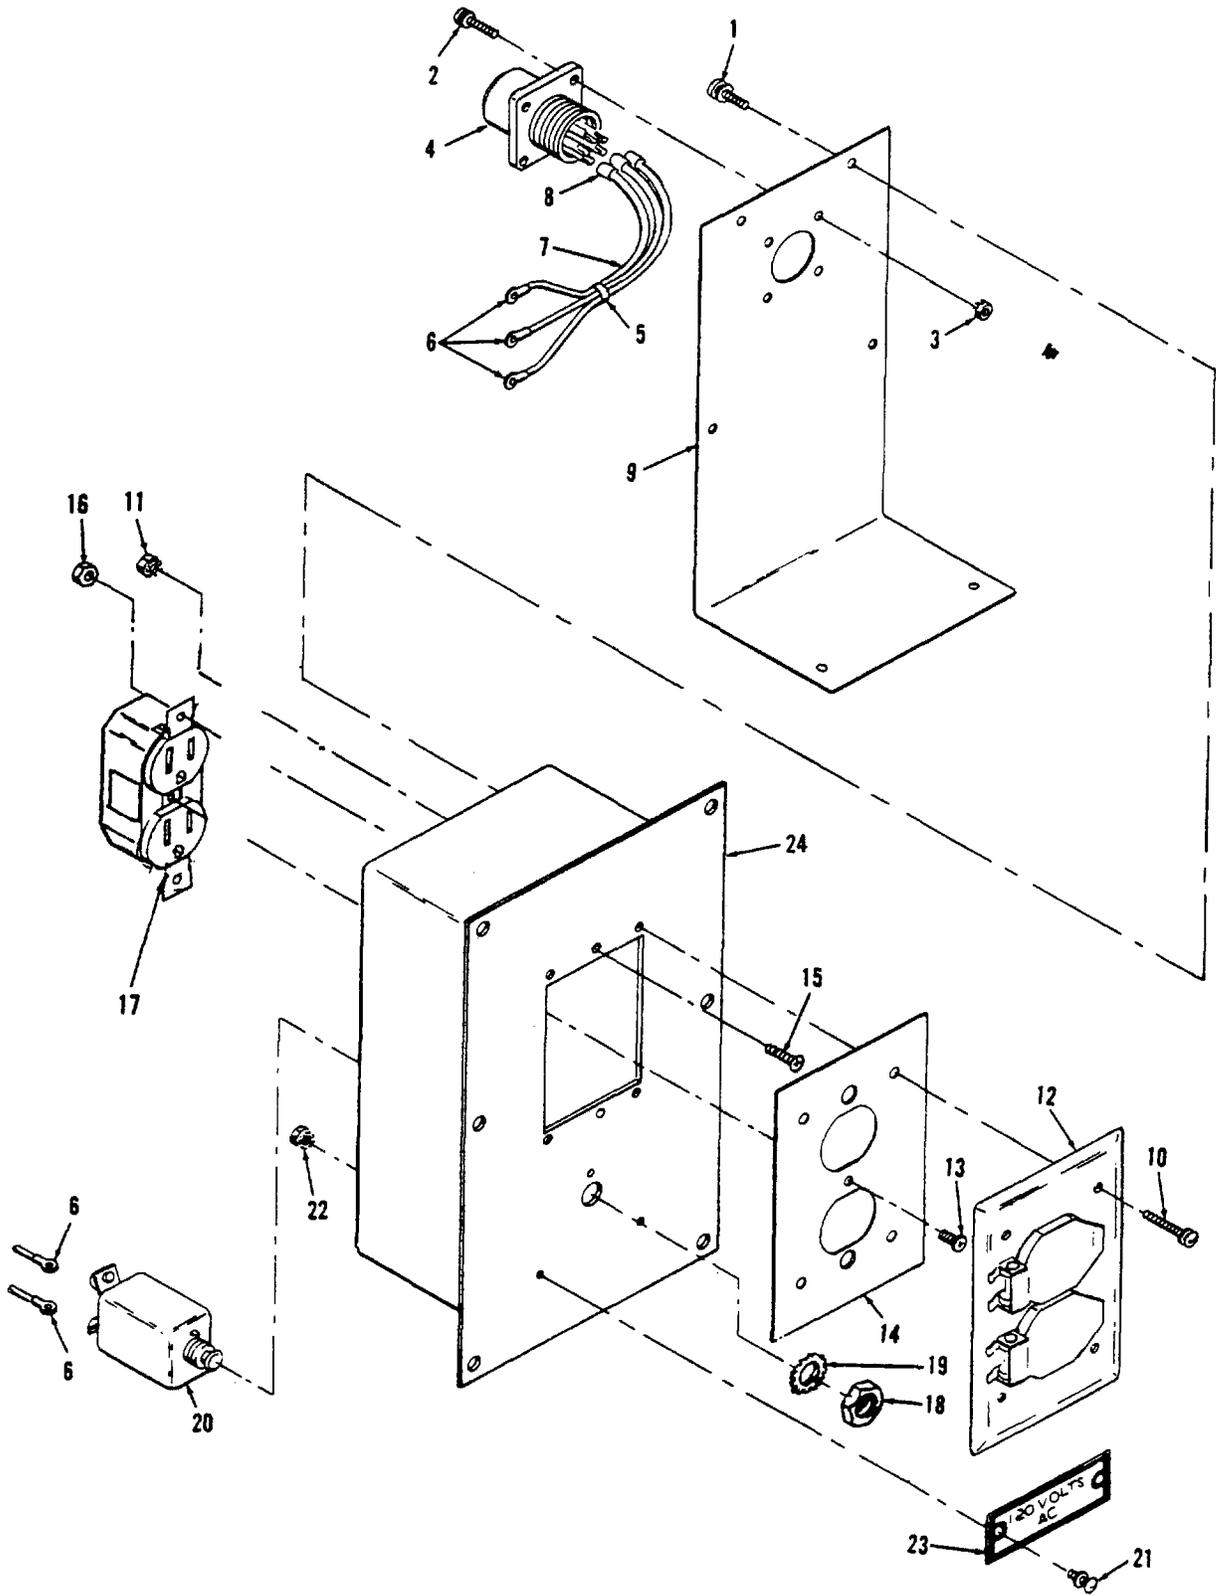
Convenience Receptacle Assembly, Exploded View
